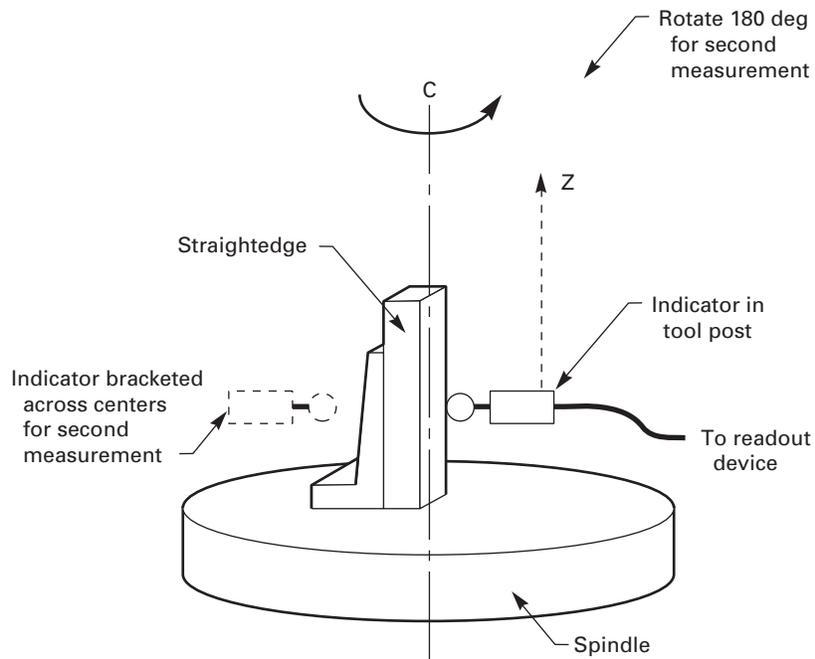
Setup for Straightedge Rotation on a Horizontal Spindle Lathe for Measuring Z-Axis Parallelism to the C-Axis
